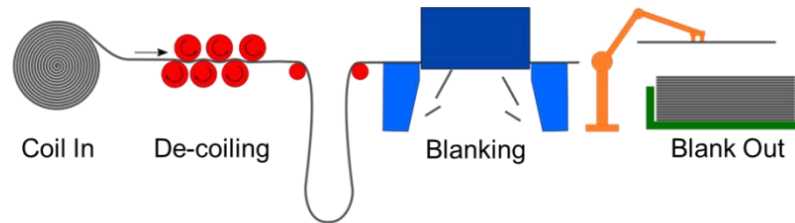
Sheet metal production processes, converting liquid metal into a useful component and scrap.
